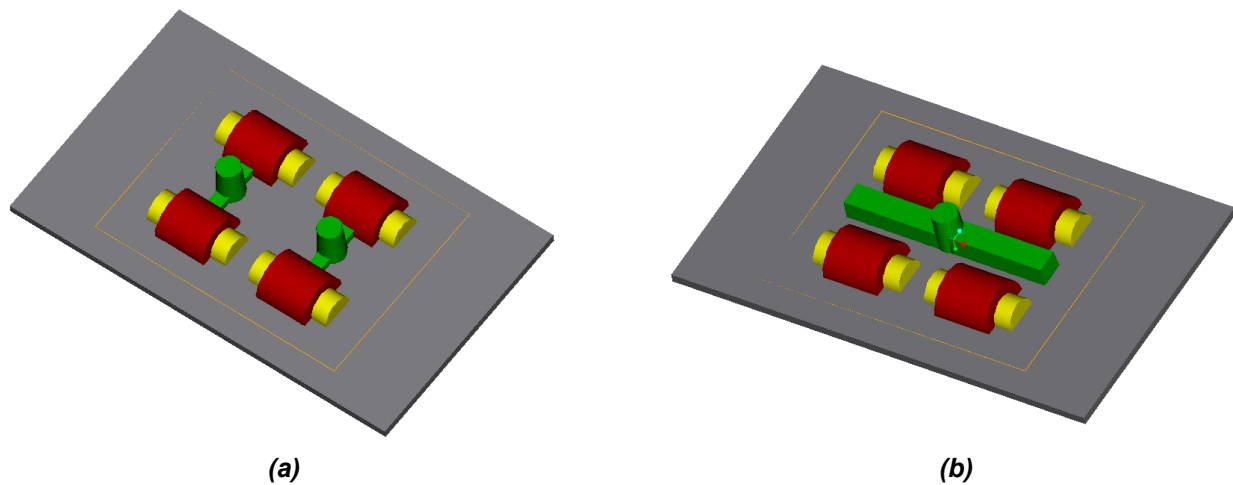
(a) Cope side and (b) drag side of experimental pattern. During molding, the sprue was manually cut during molding. The rectangle surrounding the casting and gating configuration is the flask dimension of 12" x 16".
